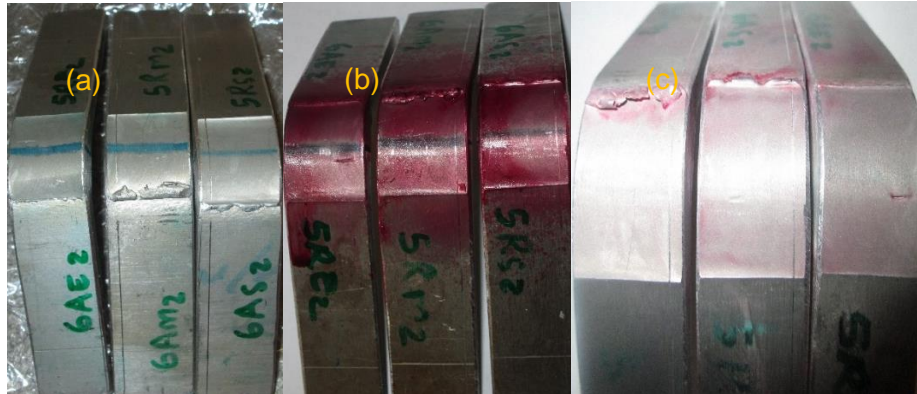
(a-c): Liquid penetrant applied on face weld joints
